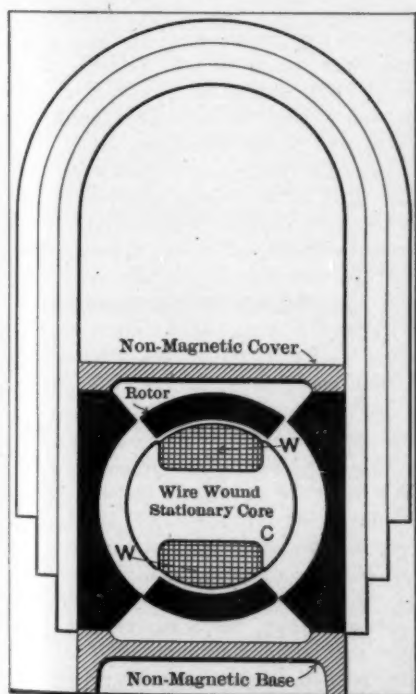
Type of magneto using a shell rotor, permanent magnets bolted to soft polar horns, and fixed armature of bobbin-like design on which windings are placed
